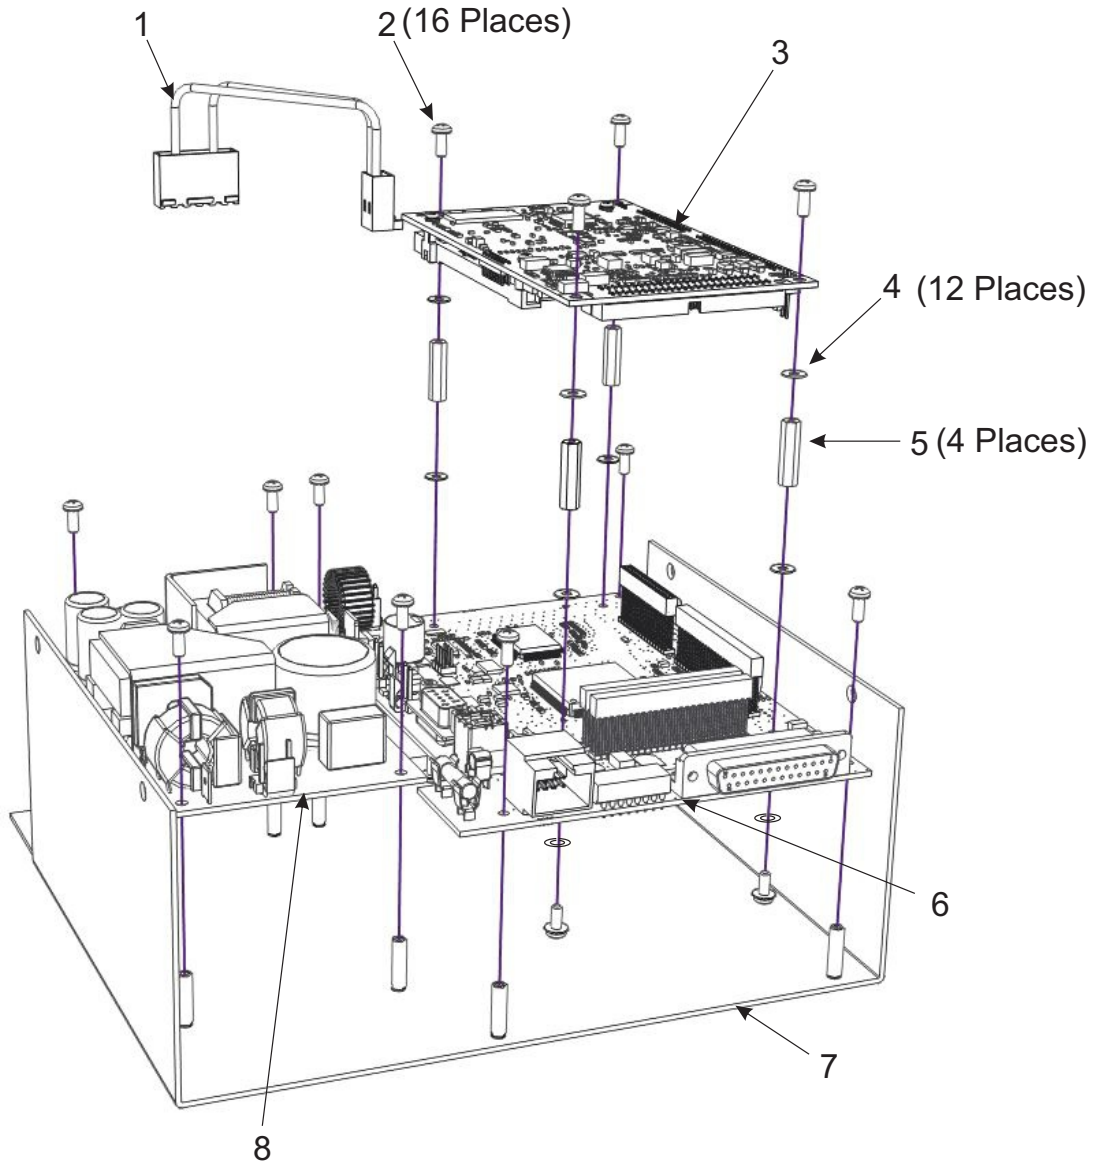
4421 RF Power Meter, Main Frame Assembly
